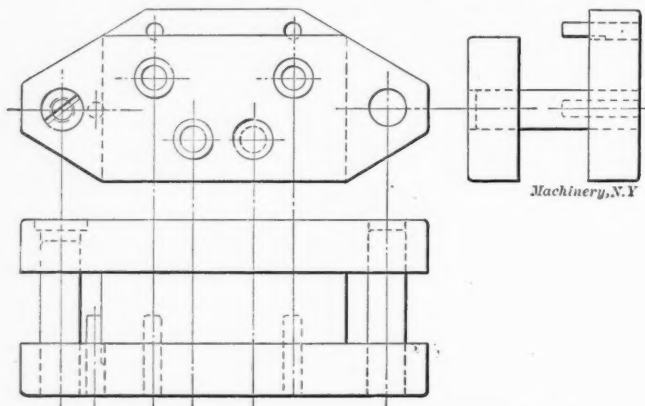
Jig in Fig 84 Improved by adding Locating Pins.
